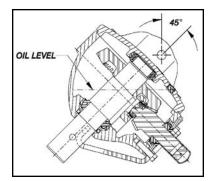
PIVOT GEARBOX 45 DEGREES TO CHECK OIL LEVEL
